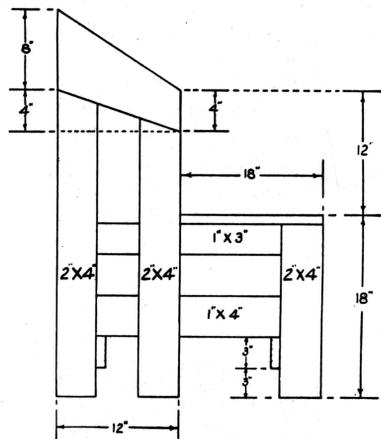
Drawing showing details of construction for the basket packing bench.
